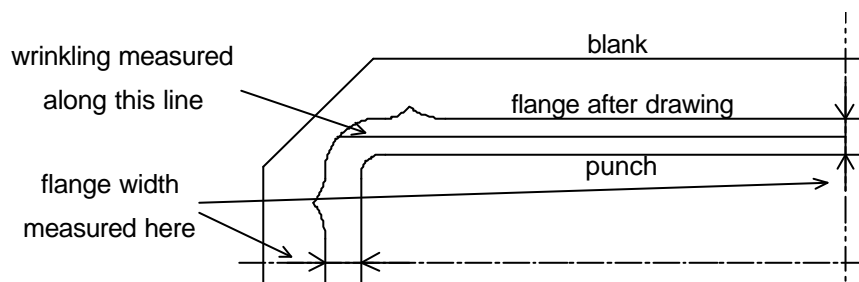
Shape of punch, blank and flange after drawing, with the positions of flange width and wrinkling measurements. Only one quarter of the product is drawn here. Drawing not to scale.
